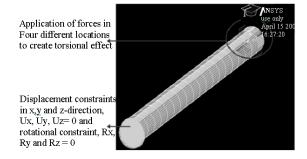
Boundary conditions for a cracked shaft under torsional load
